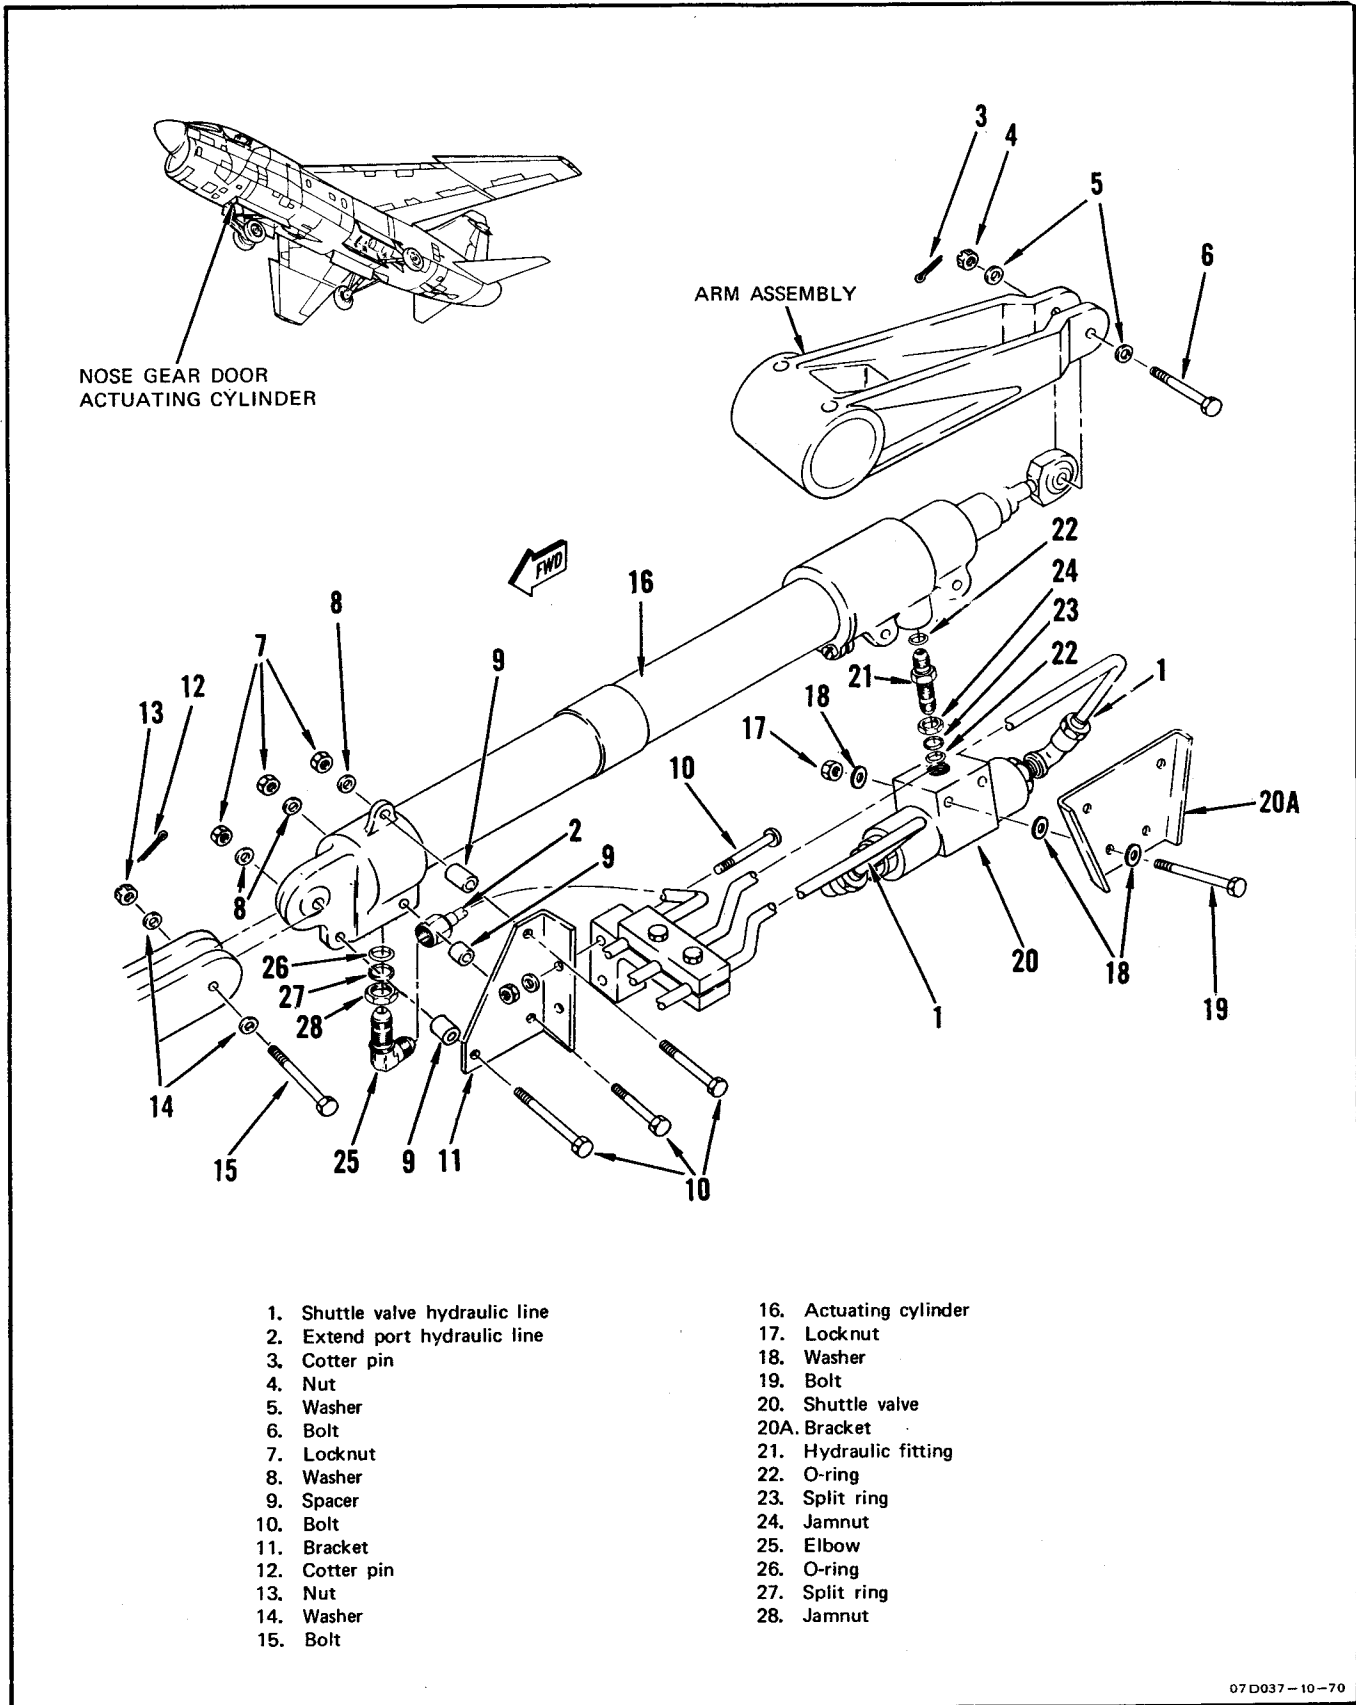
Nose Gear Door Actuating Cylinder Removal and Installation
